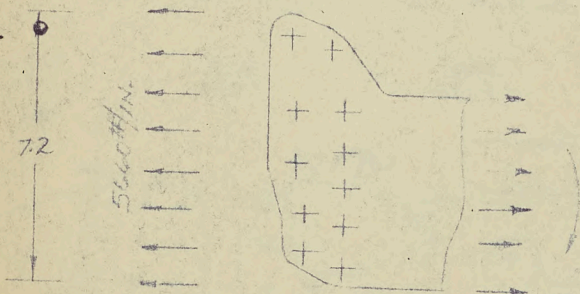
PLATE ATTACHMENT TO WING SKIN IS BY 11-1/4" BOLTS
